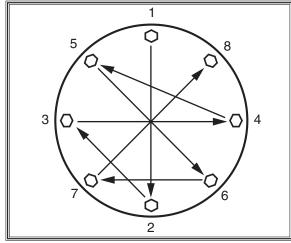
Alternating star pattern for tightening fasteners of components assembled with a gasket.
